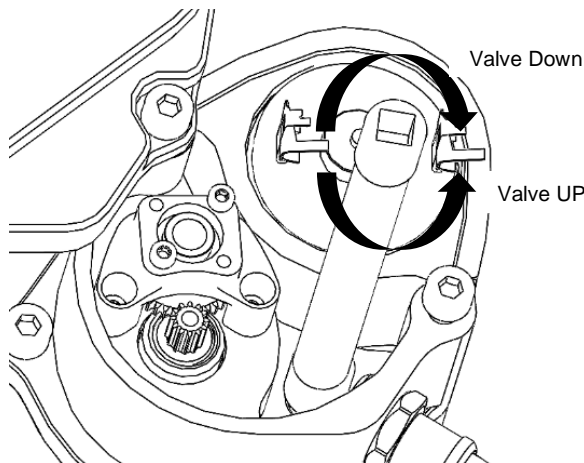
1/4 Drive extension with 5mm socket manually adjusting.
